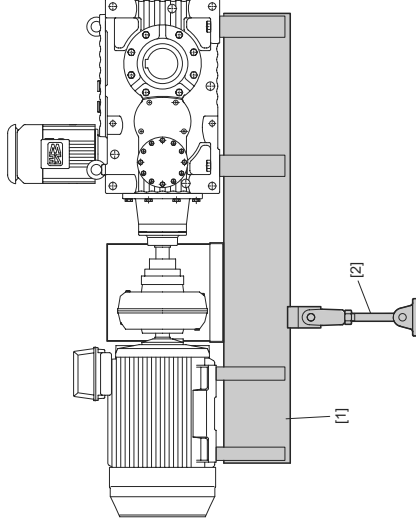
Industrial gear unit of the MC.. series on swing base with torque arm
